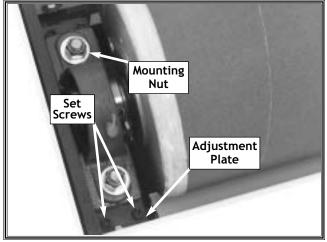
Front bearing block, nuts, and set screw tightening sequence.
